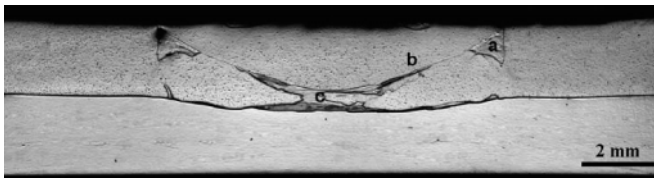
Macrograph taken from the cross section of the weld.
